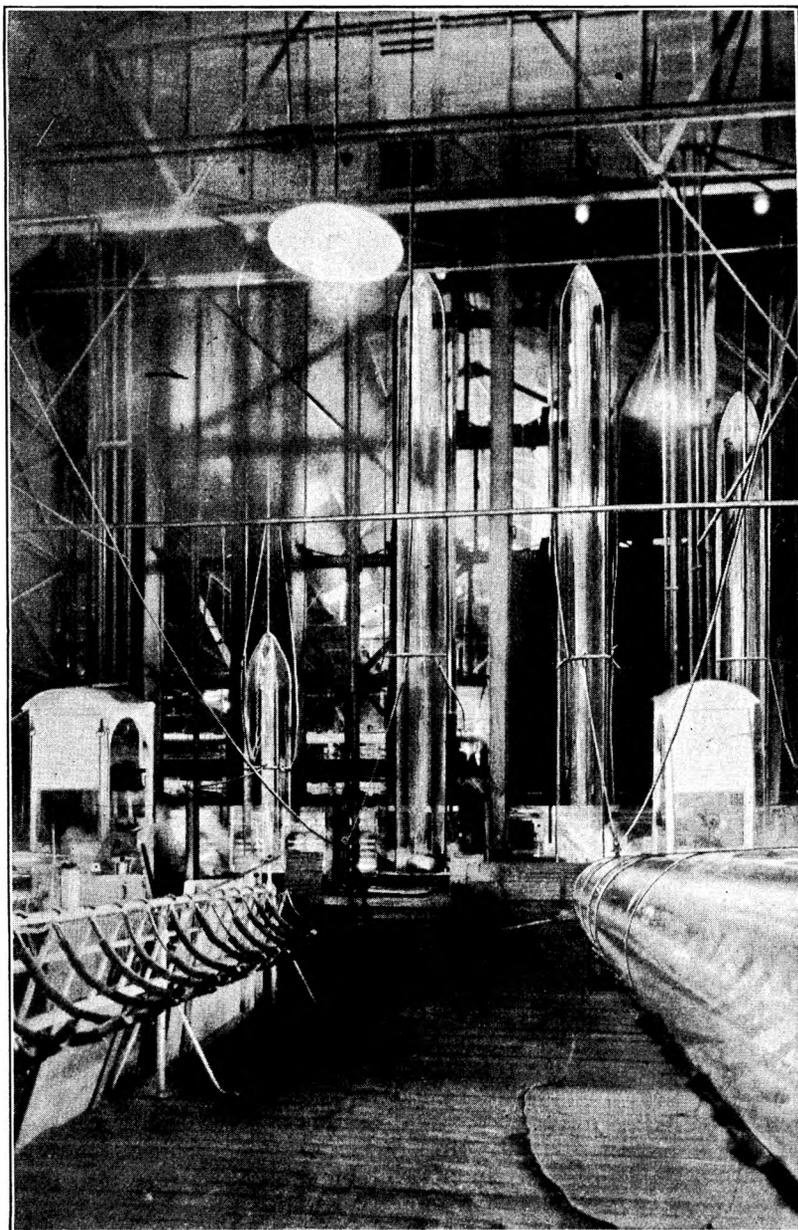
CYLINDER MACHINE PROCESS: ROW OF DRAWING MACHINES IN OPERATION
